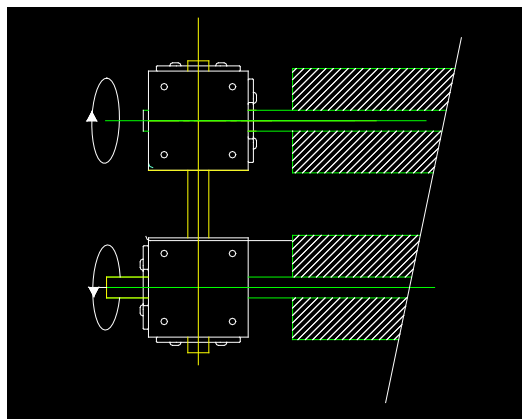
Feed rollers synchronization by two right angle gearboxes
